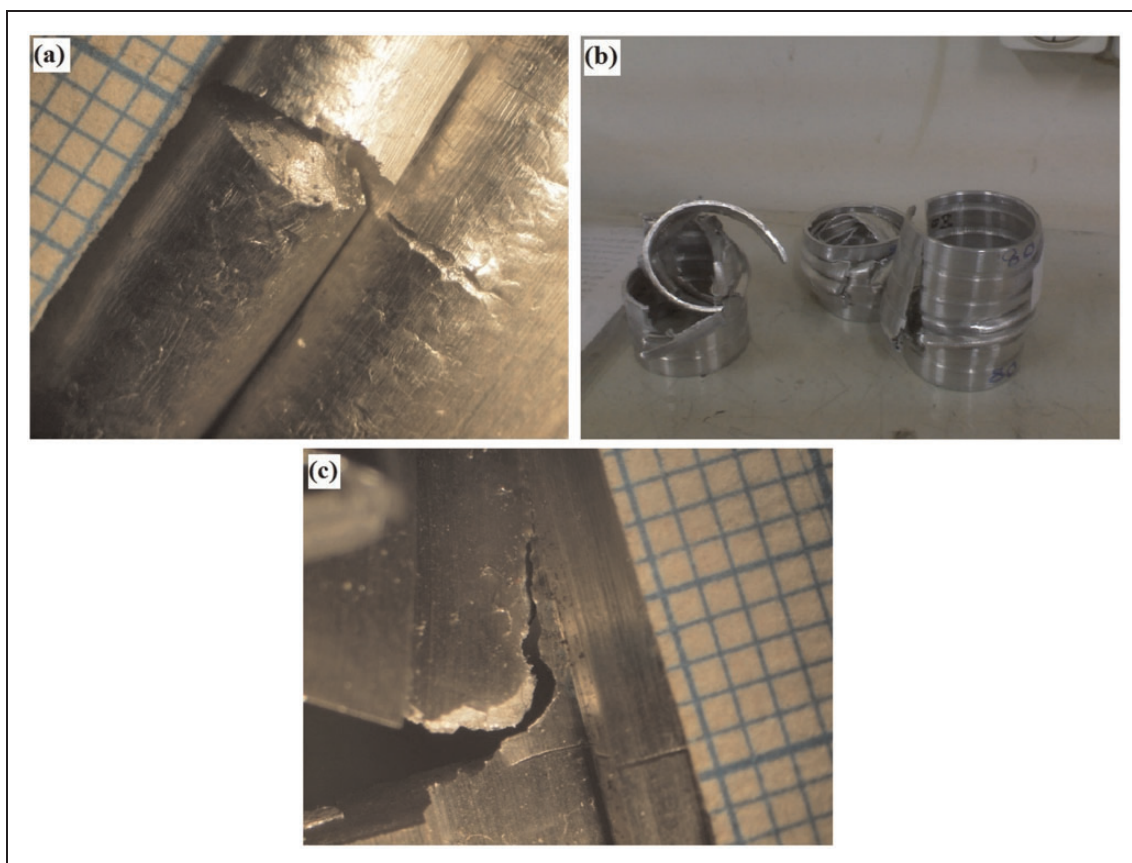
(a) Appearance of macroscopic cracks during axial compression of F20 specimen; (b) and (c) overall fracture of F80 specimen during axial compression. The dimensions of small squares are $1 \times 1 \text{ mm}^2$.
